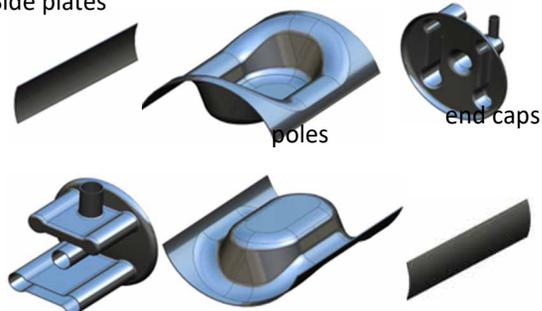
Major high-level subassemblies of the 197 MHz crab cavity prototype. Each assembly will be made from several smaller parts.
